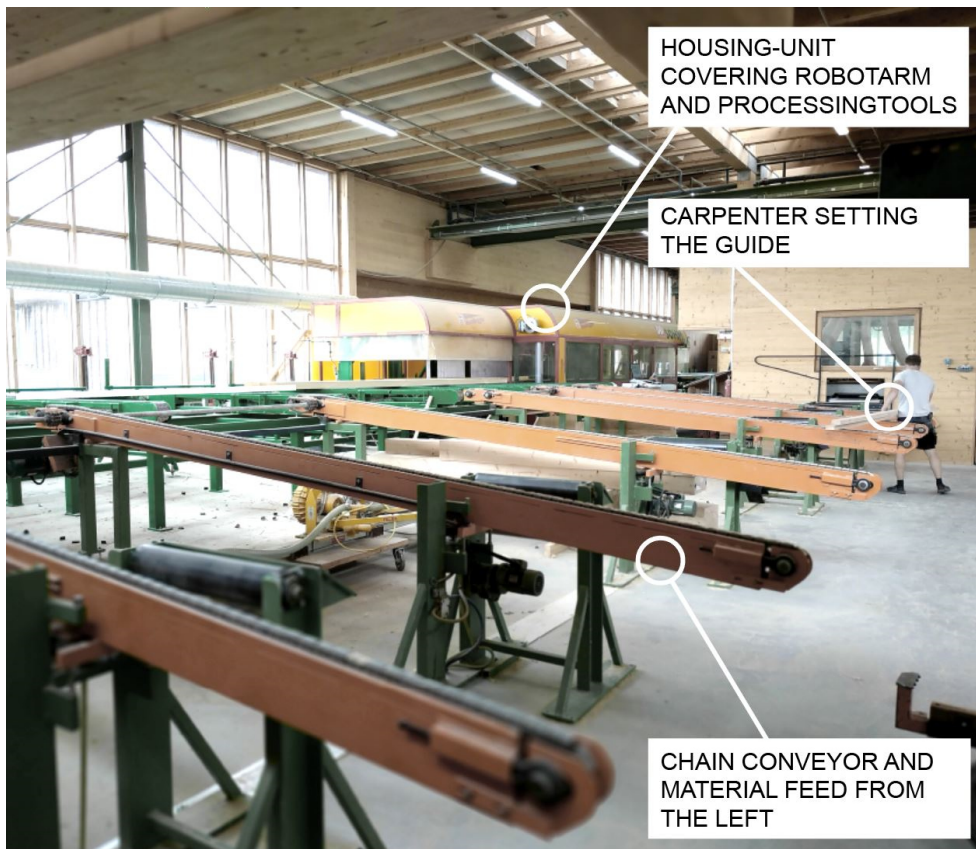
On this very large joinery machine, a chain conveyor transports the timber to the machine.
